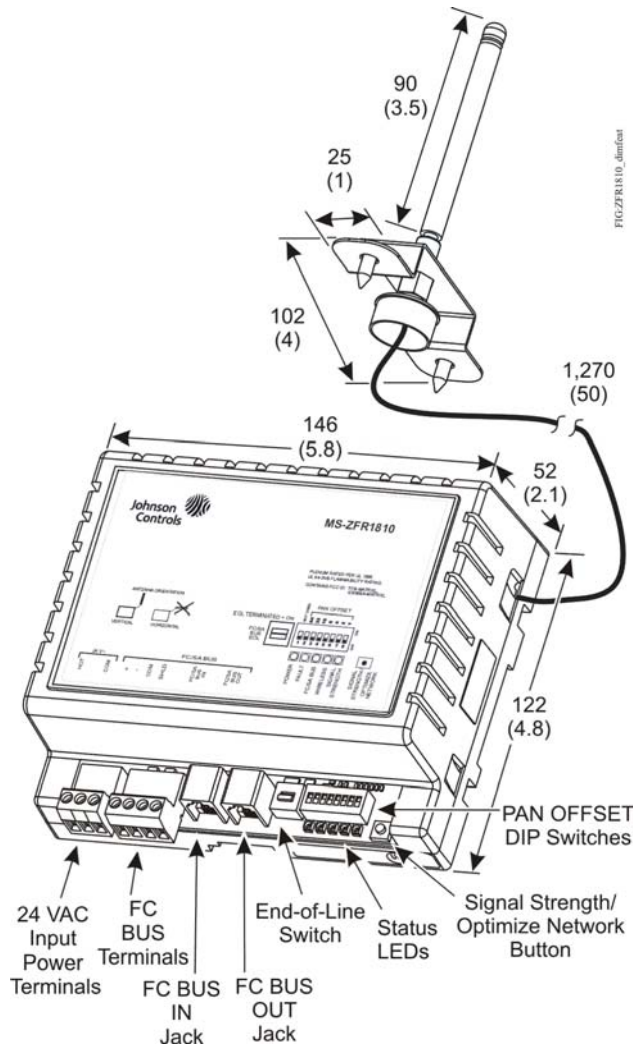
ZFR1810 Wireless Field Bus Coordinator, Physical Features and Dimensions, mm (in.)
